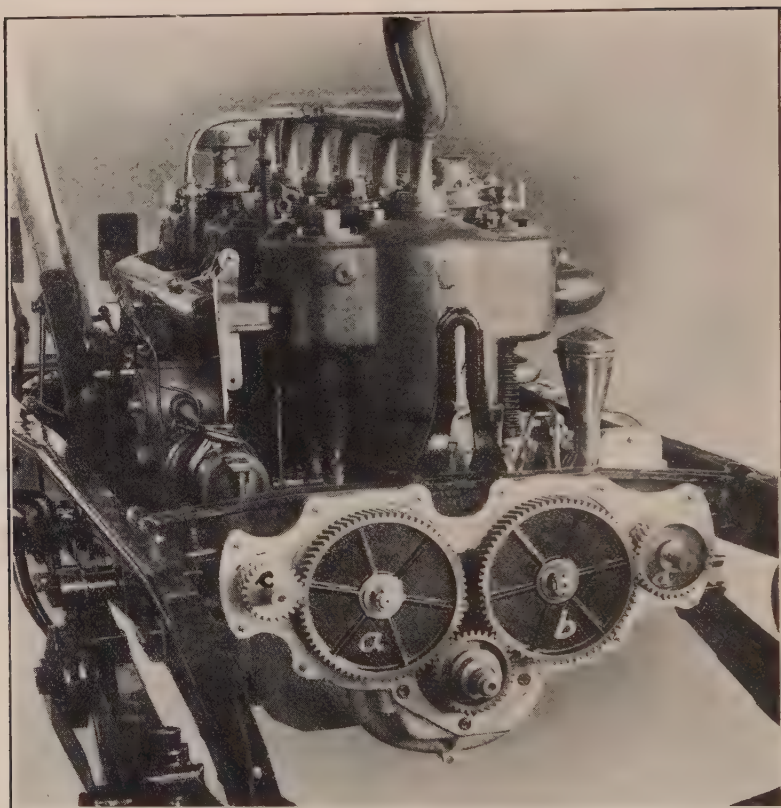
Pierce-Arrow. T-head engine. Helical spur gears for cam-shafts.
